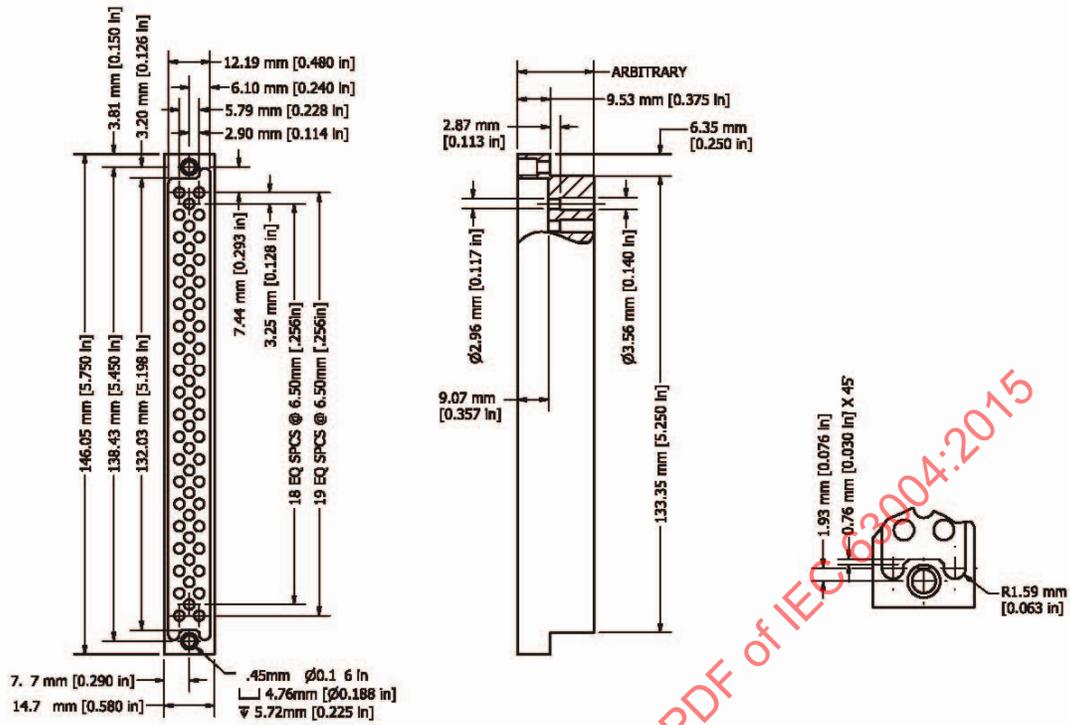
Coax module, 59 position for 5 GHz contact, fixture housing physical layout
